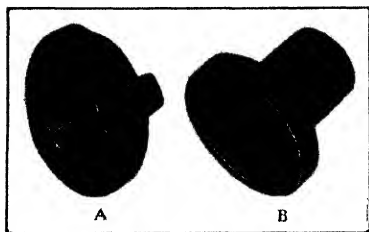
Two similar and fairly severe brass press forgings in which speed of action made the difference between chilled failure and success.
